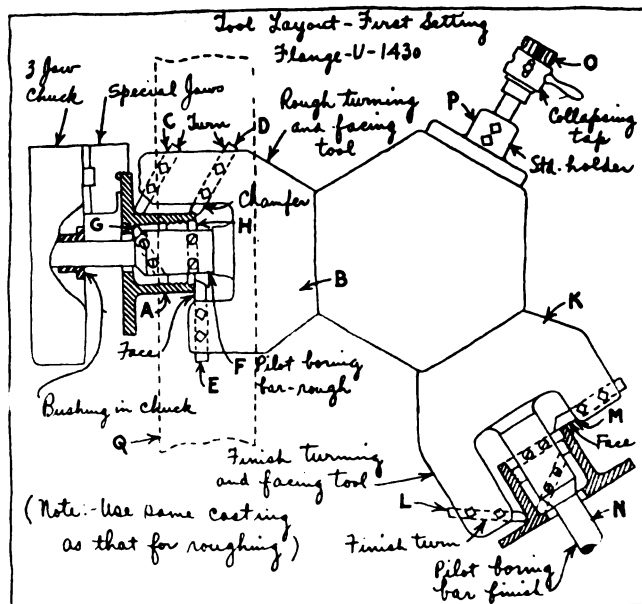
TOOL ENGINEER'S FREEHAND SKETCH OF TOOL EQUIPMENT FOR TURRET LATHE
